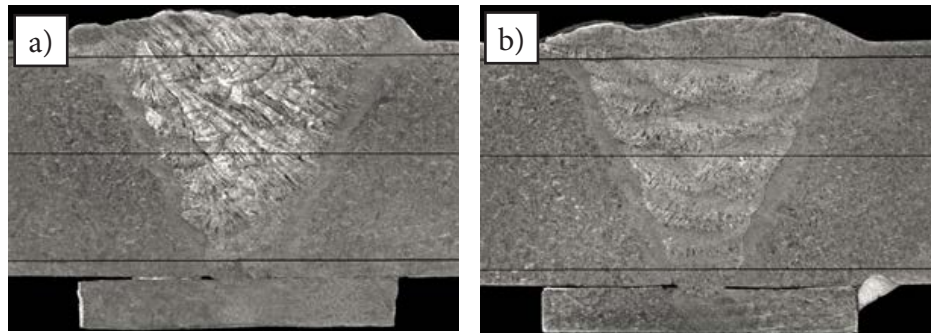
The macrostructure of welds obtained by using: a) the PC position, b) the PF position
